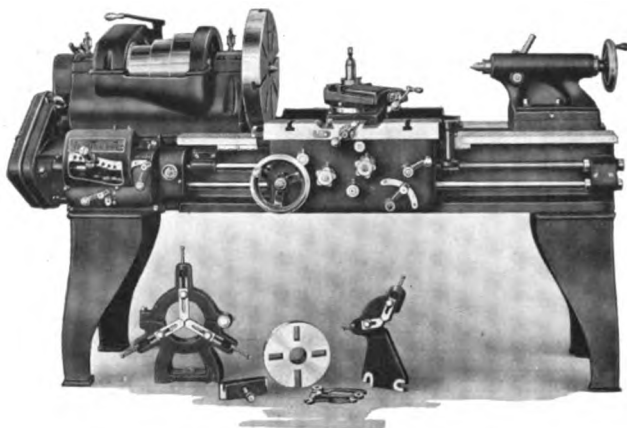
Economy 18-Inch Swing, Double-Back Geared, Quick Change Engine Lathe
